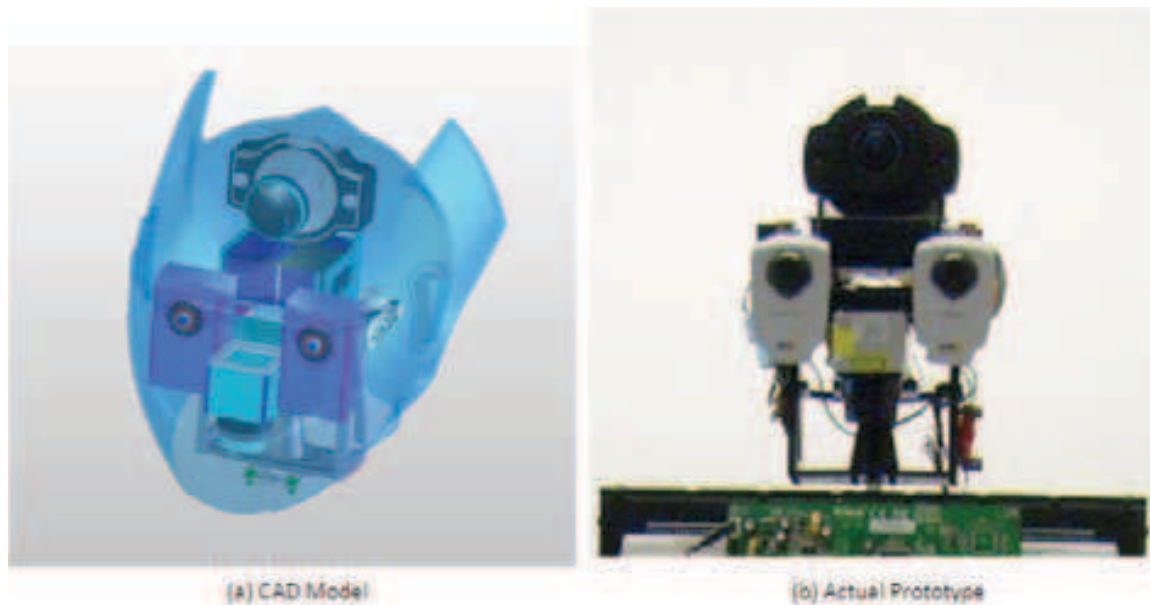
Head of LOCH humanoid robot: a) CAD model and b) actual prototype.
